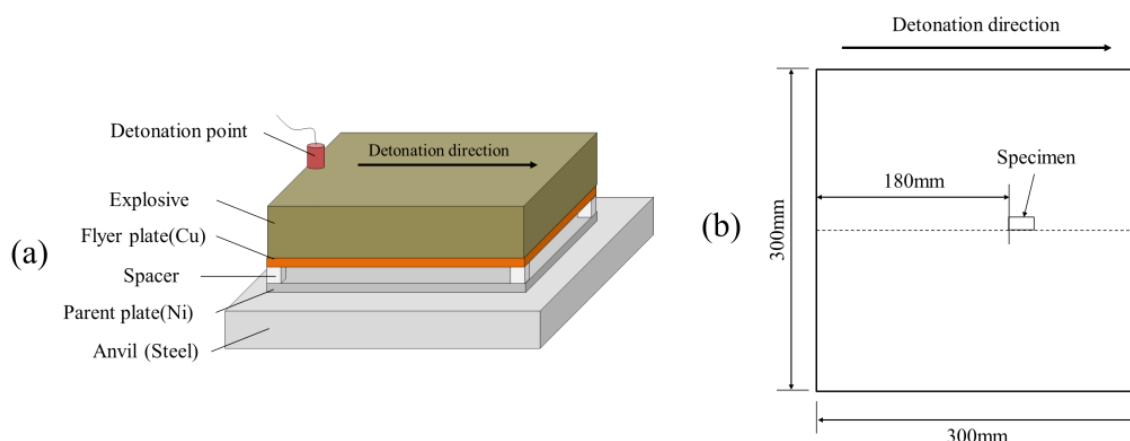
2 (a) Schematic illustration of the explosive welding setup, (b) Position of the specimen for microstructure observation.
